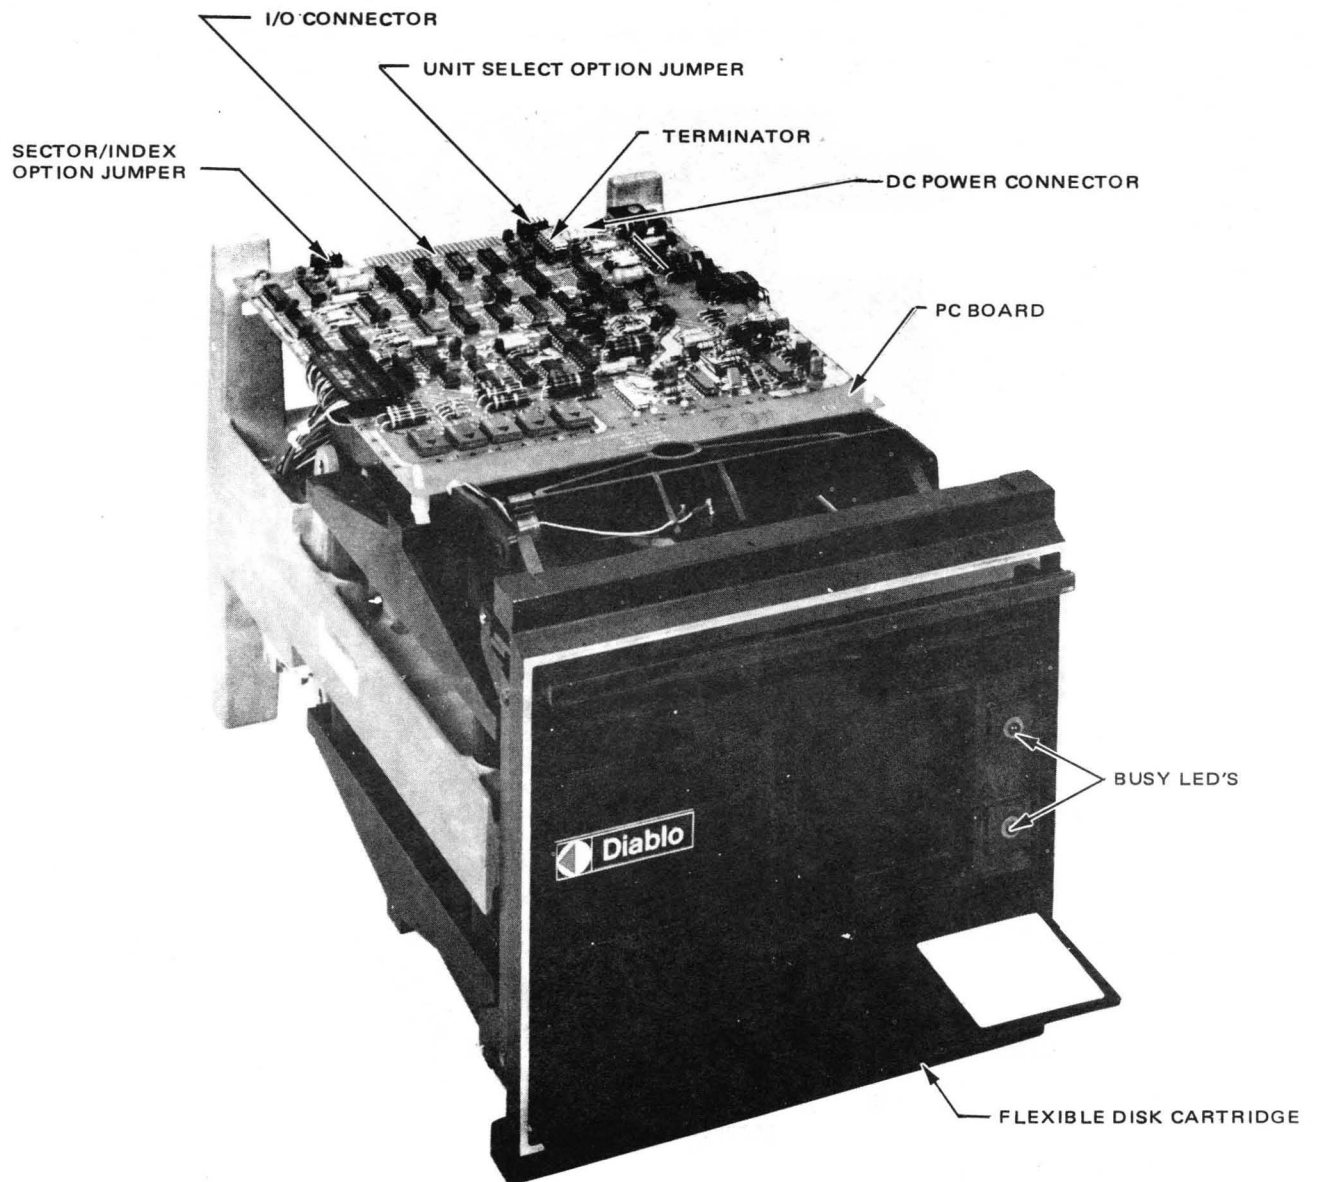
MAJOR ASSEMBLY LOCATIONS
